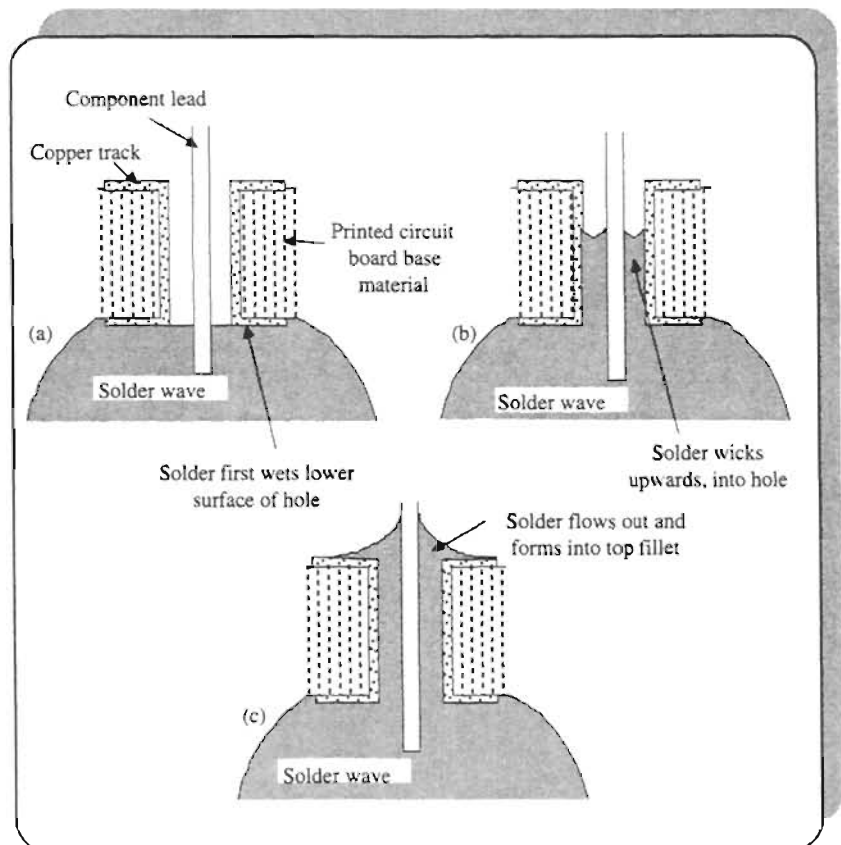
Illustrating the fact that it takes time for each joint to be soldered (a) as an assembly first meets the solder wave (b) after a short time solder begins to wick up the through-hole (c) after further time the top fillet is completed
